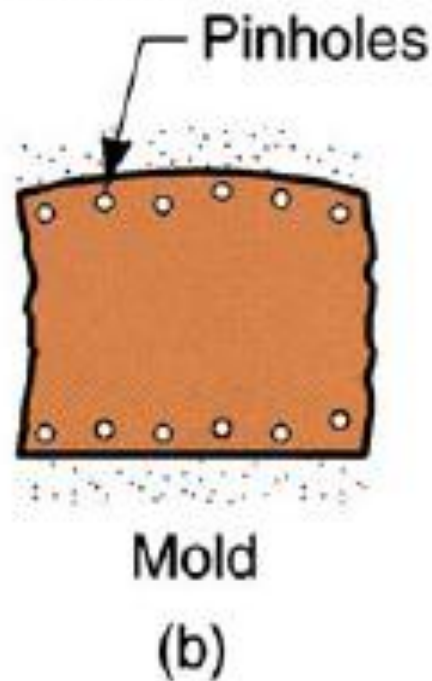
Common defects in sand castings: (b) pin holes
